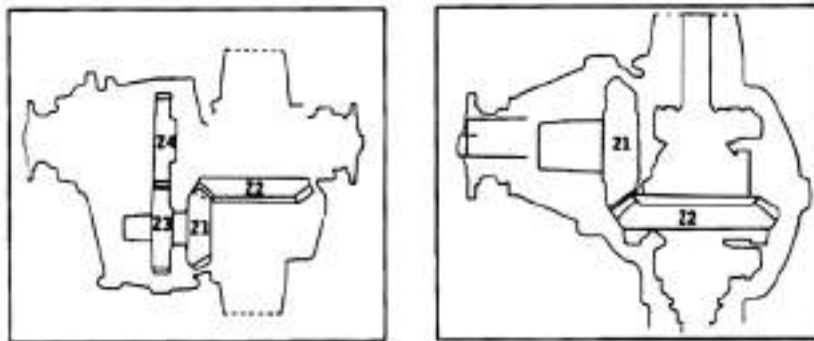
Tooth number of central transmission gear for middle axle and rear axle
